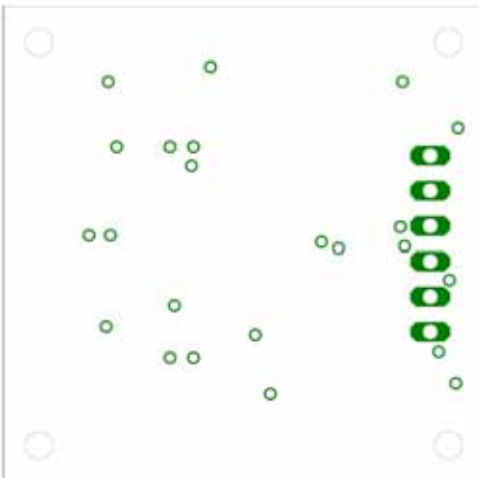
Zoomed view (200%) of the sensor board PCB drill layout.
